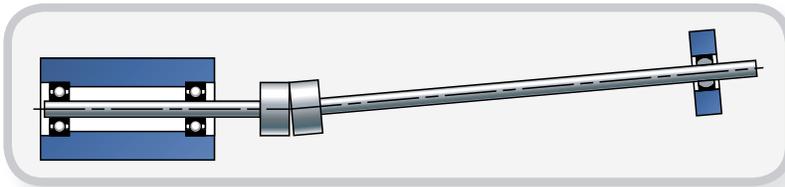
A semi-floating shaft located by a self-aligning bearing at one end should be supported with a single-stage coupling at the other.
